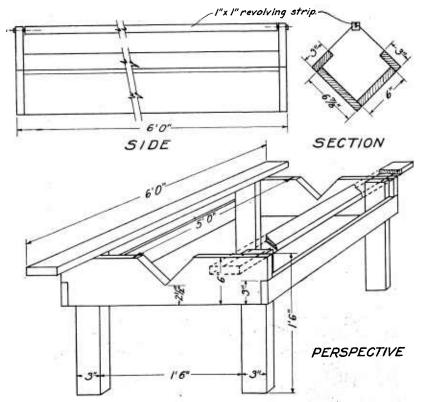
Plan of dry-mash hopper shown in Figure 17
